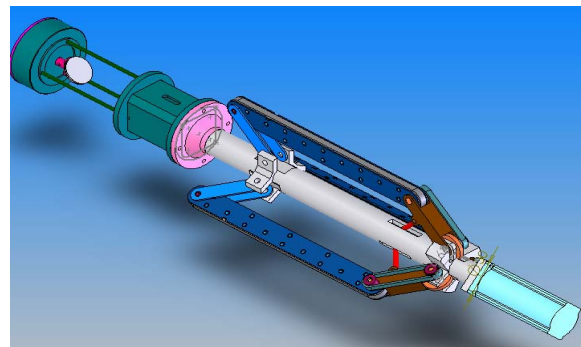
Assembly drawing of robot system whole system is composed of stepping
